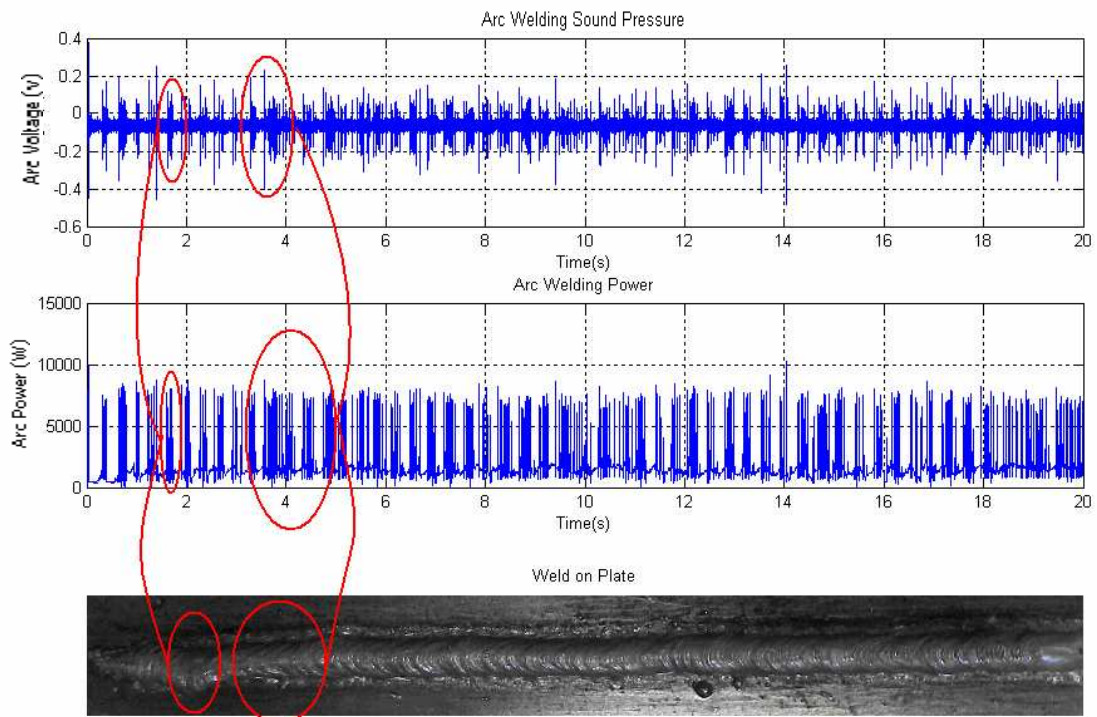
Weld Defect Identification of power and sound pressure (Test 1)
